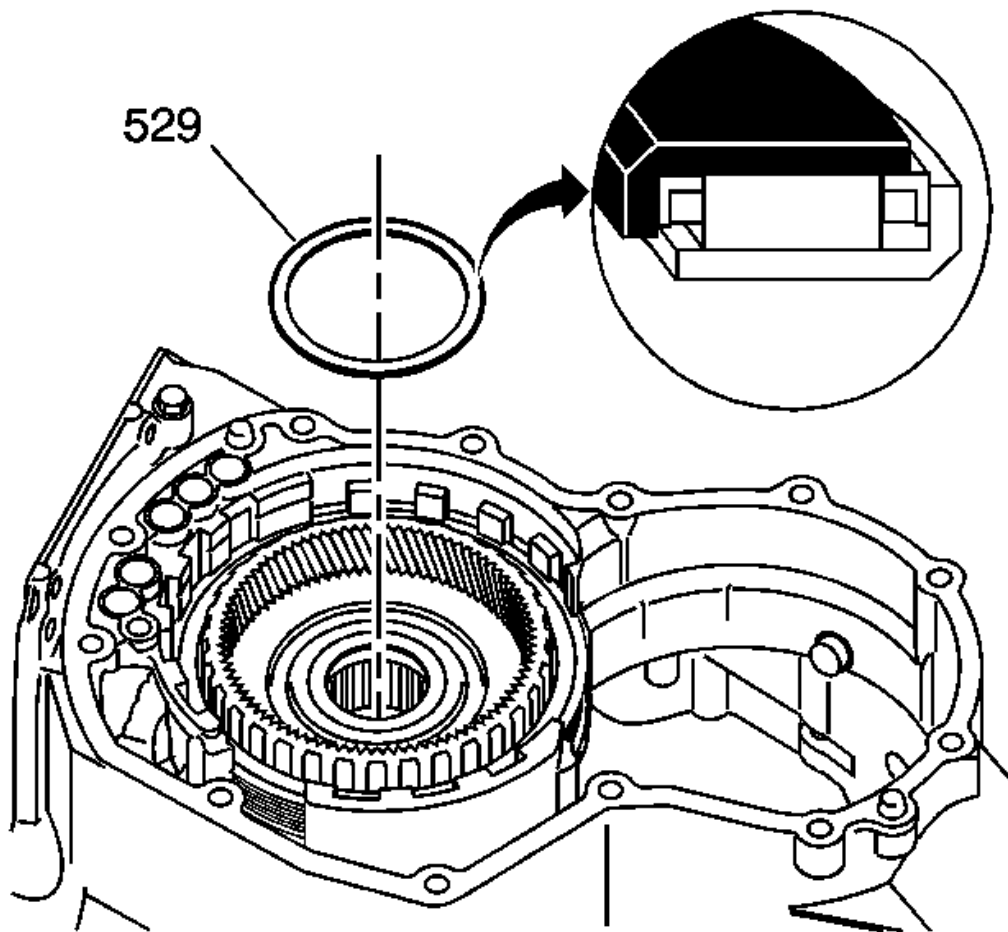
A/Trans Case Assembly - Torque Converter and Differential Housing Side
